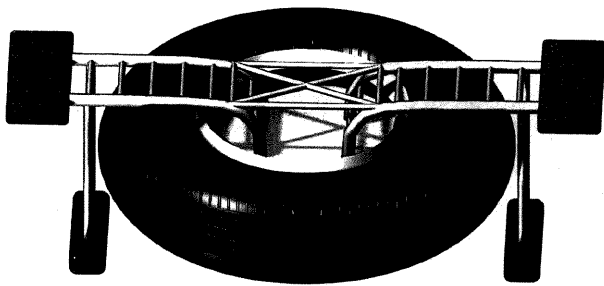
AXONOMETRIC VIEW 2 OF WHEEL (WEIGHT)
